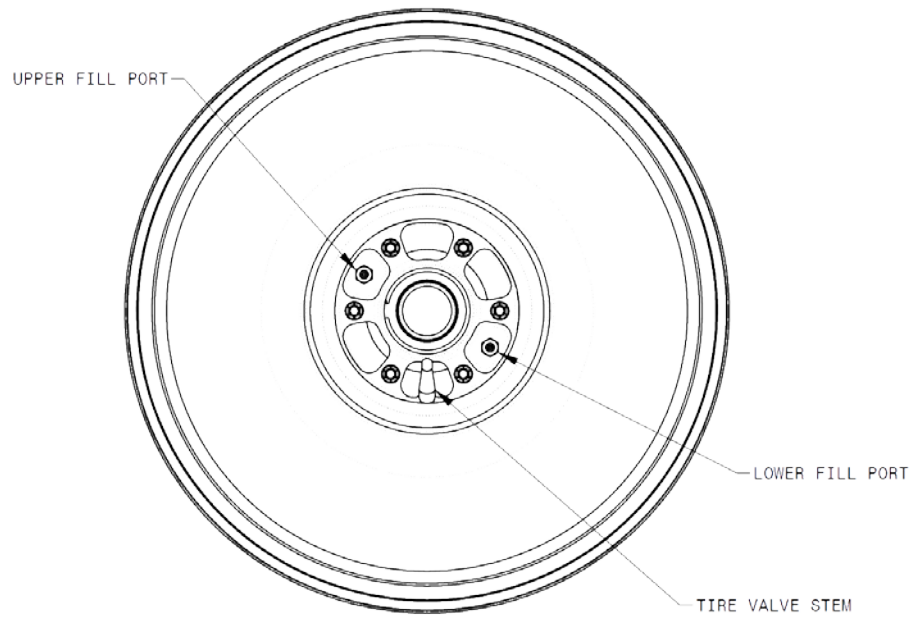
a Showing orientation (clocking) of 35A-51800 main wheel fill ports
